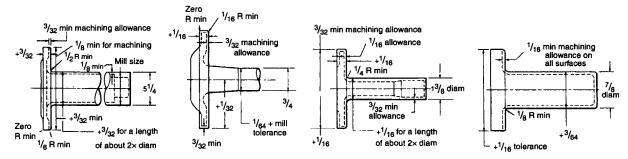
Design practice for upset forgings with specifications determined by raw material stock diameter. Tolerances (shown with + or – sign), allowances, and design rules for upset forgings of various typical or common shapes. Dimensions given in inches
